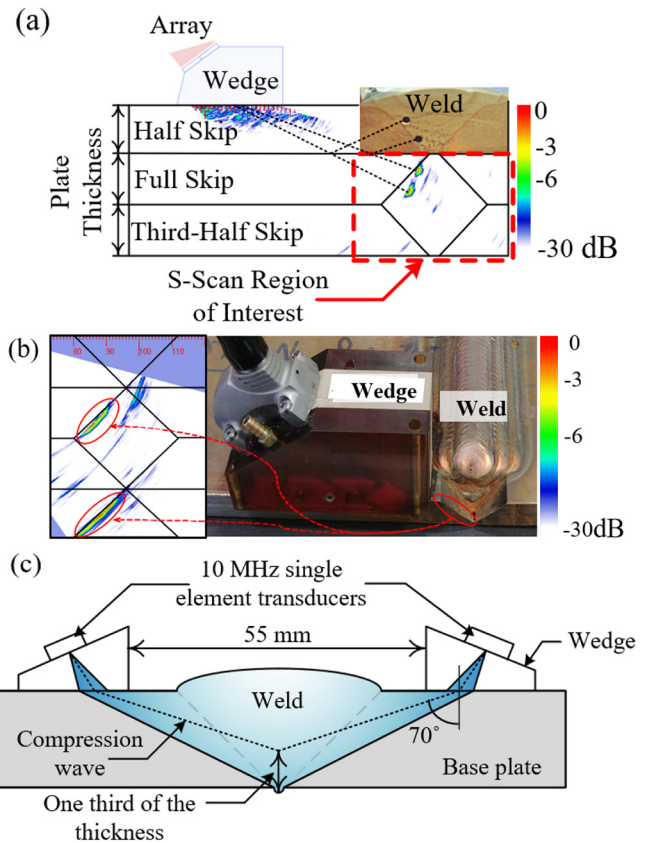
(a) the gain calibration based on the signal of the two $\phi 2$ mm side-drilled holes received in the S-scan image, (b) the adjustment of the horizontal position of the weld overlays with respect to the reflections received from the weld flanks in the S-scan image, and (c) the TOFD assembly of the transducers and wedges generating 70° compression waves within the weld.
